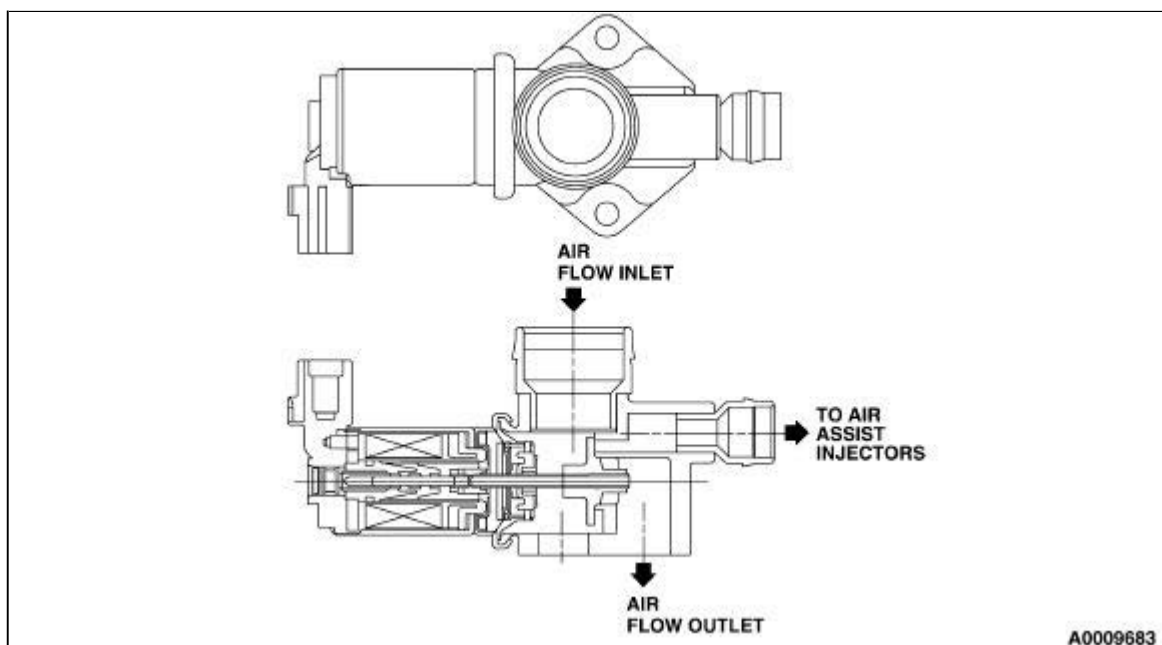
Hitachi Idle Air Control (IAC) Valve Assembly with Air-Assist Injectors
